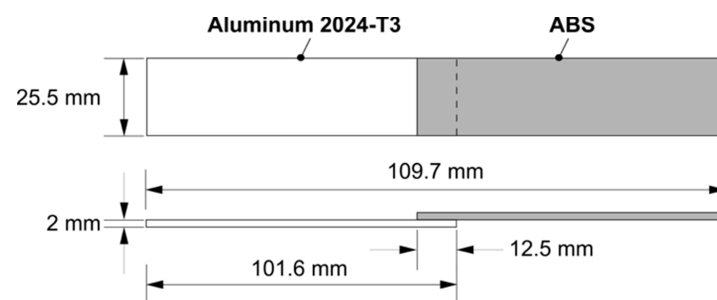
Schematic of lap shear testing specimen geometry for the AddJoining hybrid joints.
